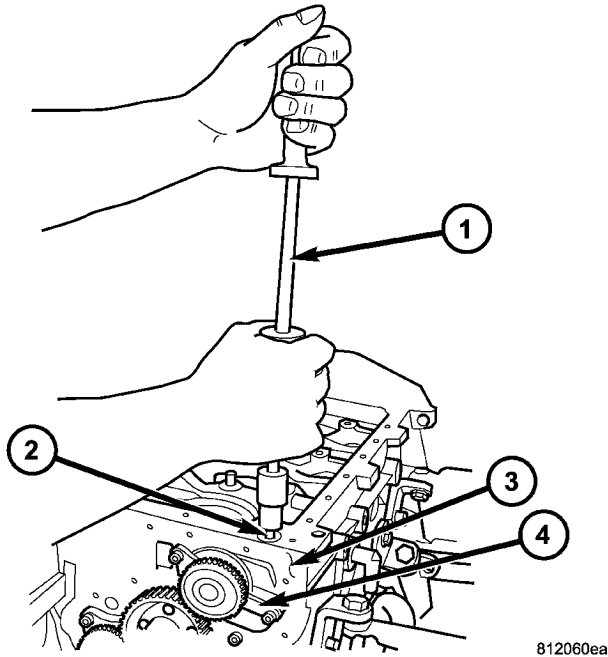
OIL PRESSURE RELIEF VALVE REMOVAL
